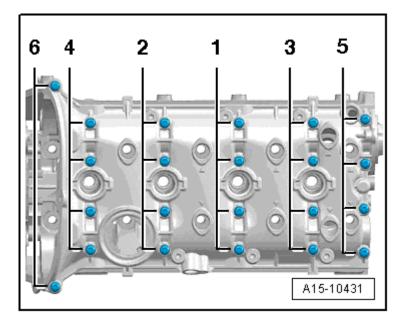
Identifying Cylinder Head Cover - Tightening Sequence
